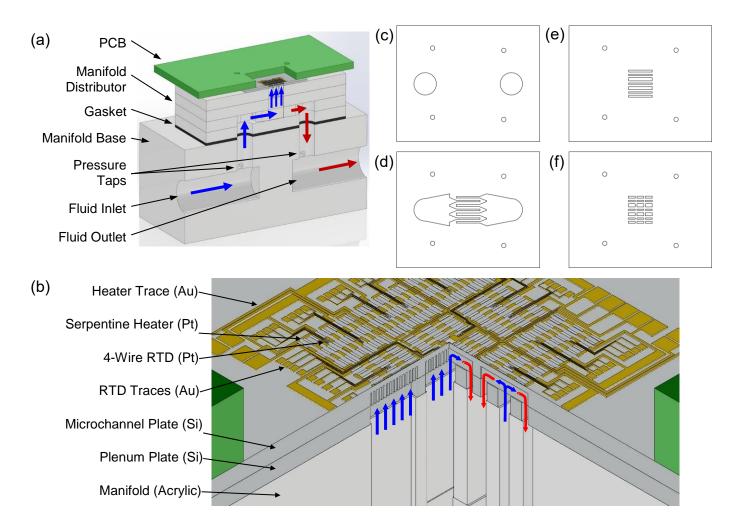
(a) CAD image of the test vehicle with a half-symmetry section removed and fluid inlets (blue) and outlets (red) shown; (b) zoomed-in view of the test vehicle with a quarter-symmetry section removed showing the fluid flow paths in the test chip; and (c-f) each plate level of the manifold distributor used to deliver fluid to individual heat sinks.
